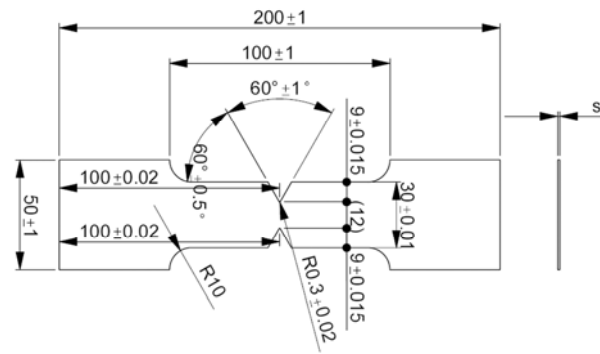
Specimen geometry and dimensions for SSRT tests. The thickness s depends on the steel strip thickness.
